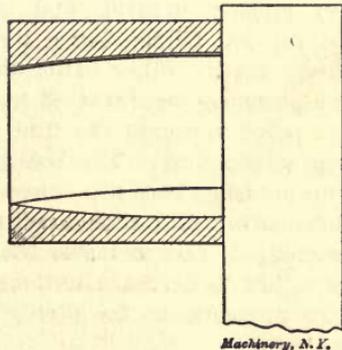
Section showing the Bending of a Crank-pin and Consequent Unequal Wear of the Box
